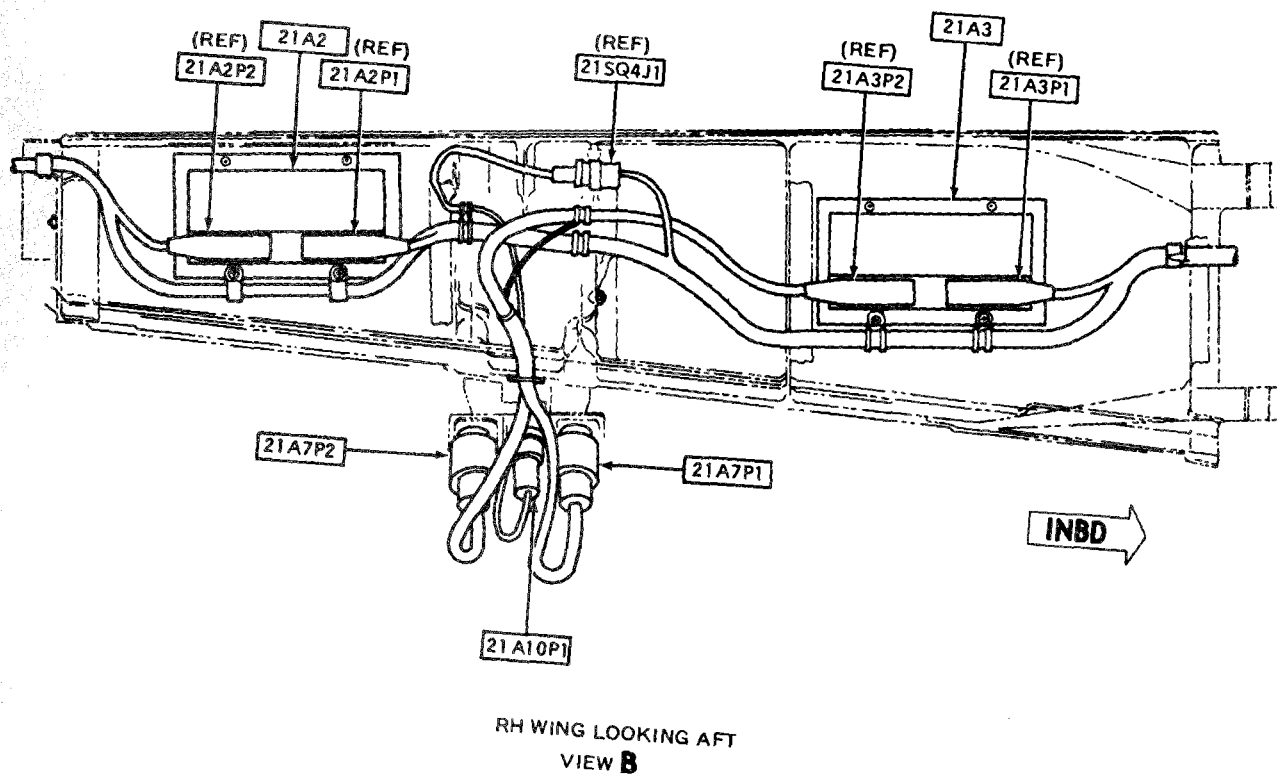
M Wing Stores Armament Subsystem (Equipment Location) (Sheet 1 of 12)
